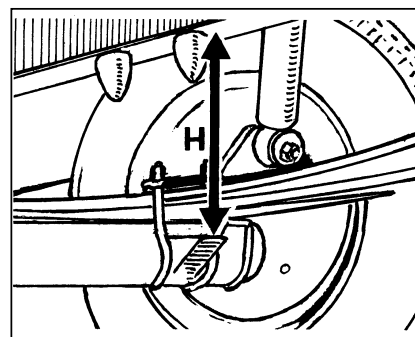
Before tightening the spring bolts and shock absorber fastenings, the vehicle should be loaded so that the height "H" is 107 mm.
